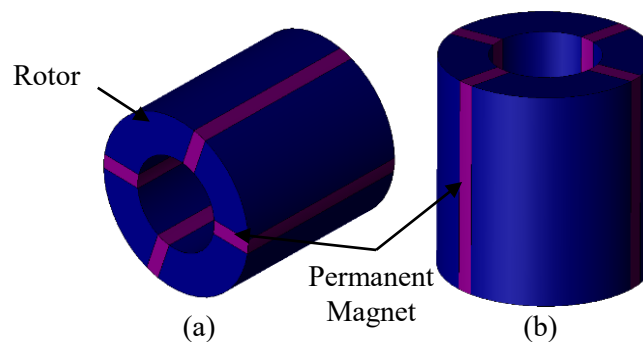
Radial pole pairing rotor design a) Isometric view b) Top view
